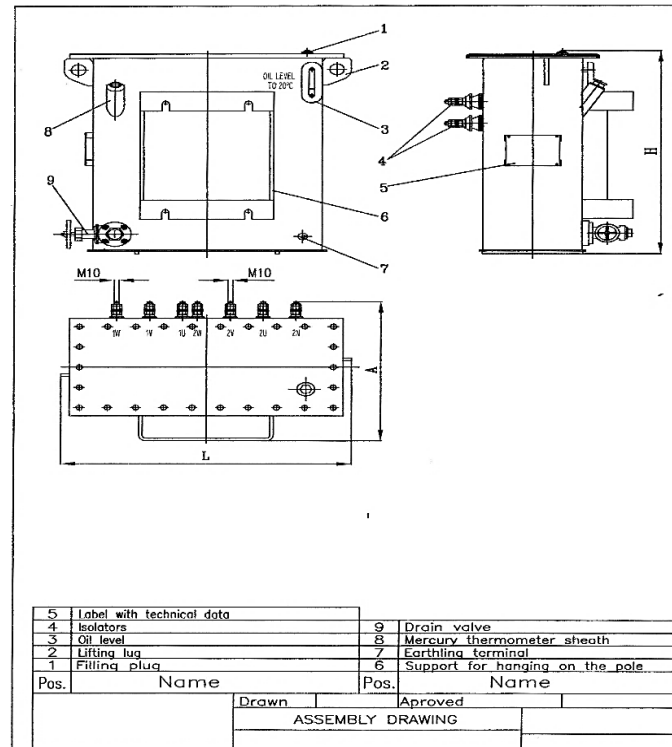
Ensemble drawing for transformer type TTU-EPA.
